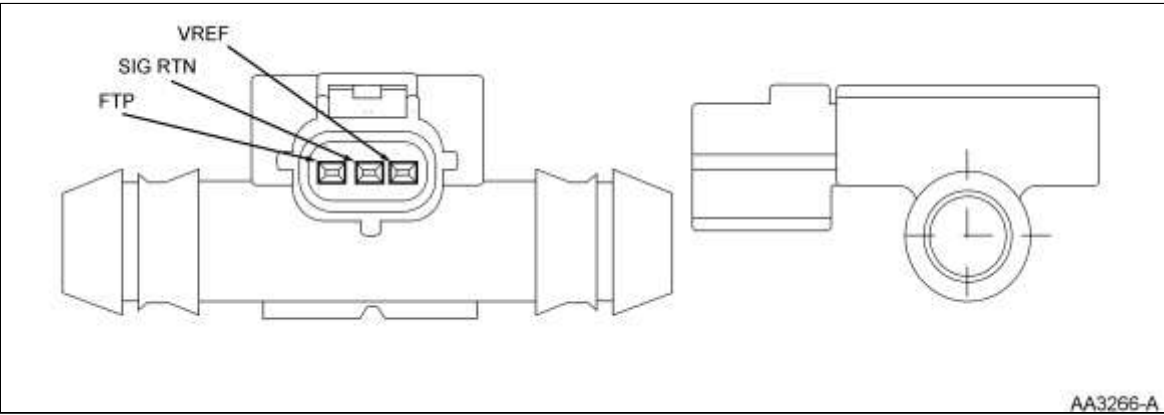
In-Line Fuel Tank Pressure (FTP) Sensor
